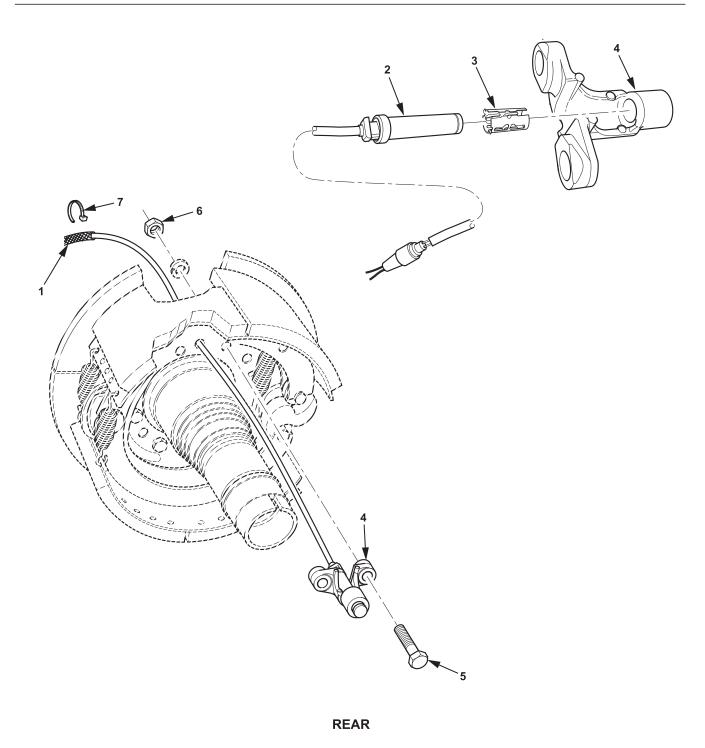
Front and Rear Wheel Sensors (Sheet 2 of 2).
